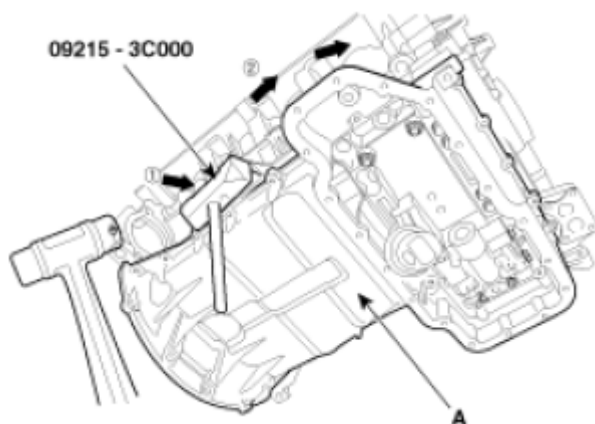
Cutting Sealer To Remove Upper Oil Pan
